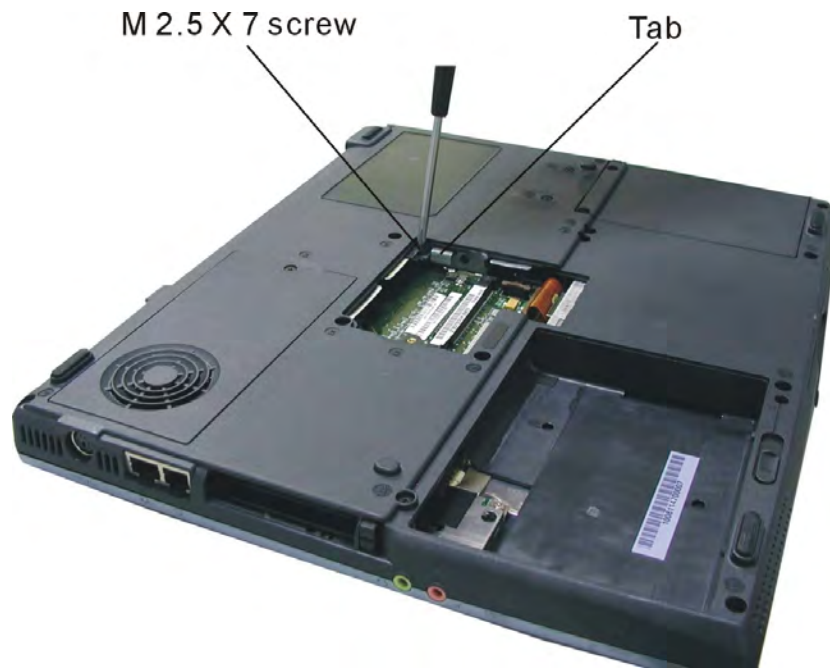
Removing one screw securing the CD-RW/DVD-ROM or CD-ROM/Combo Drive
